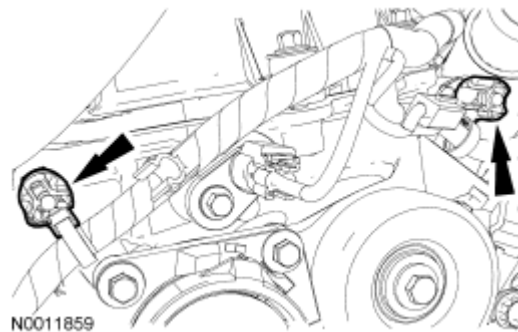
Locating Engine Wiring Harness Pin-Type Retainers
